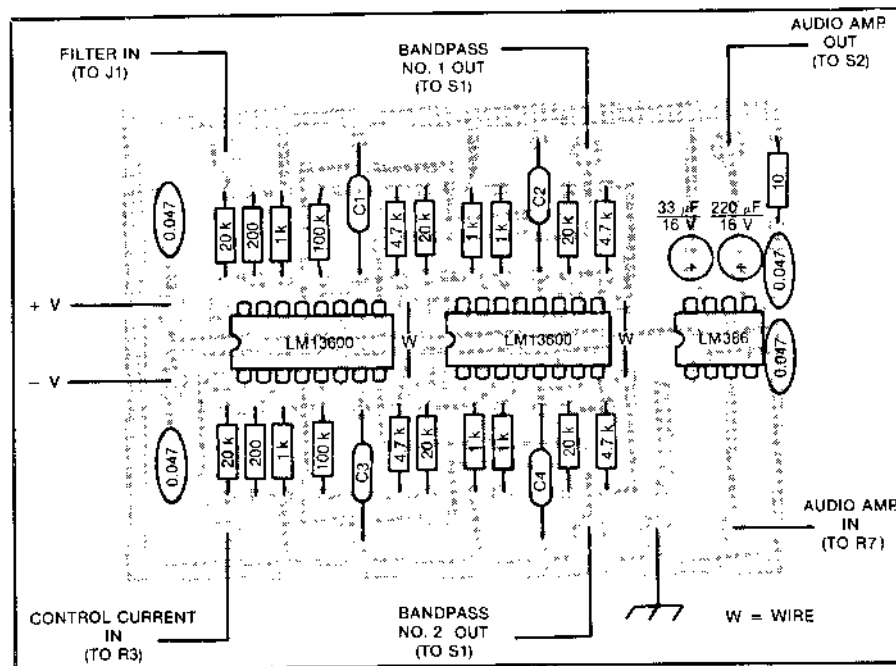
Parts-placement guide for the tunable cw filter. Parts are placed on the nonfoil side of the board; the shaded area represents an X-ray view of the copper pattern.
